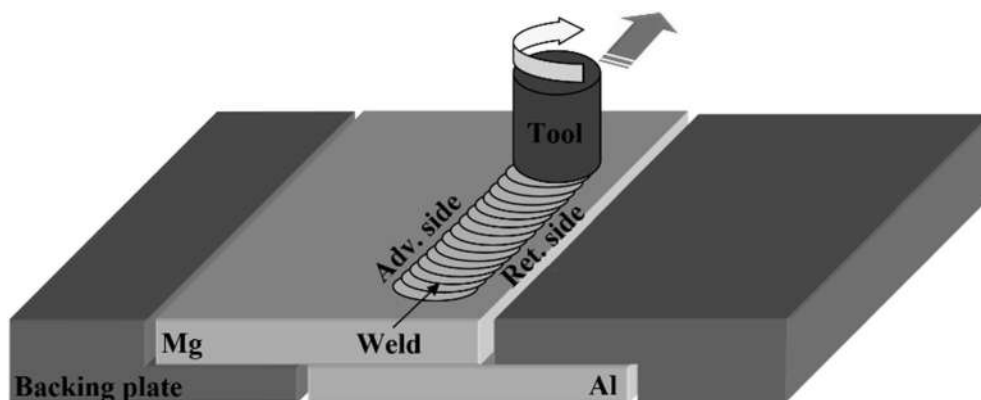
Schematic view showing plates position and welding direction, advancing side (AS) and retarding side (RS).
